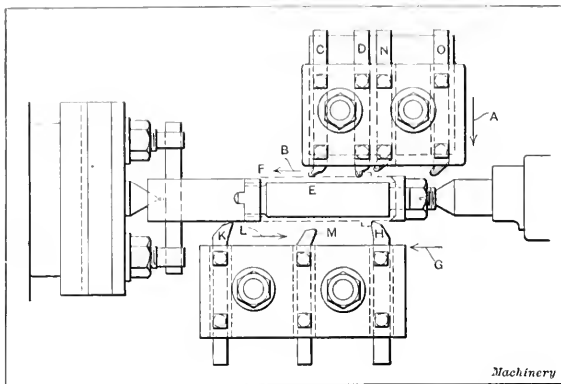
Tool Arrangement for turning Half-bushings shown in Fig. 3
